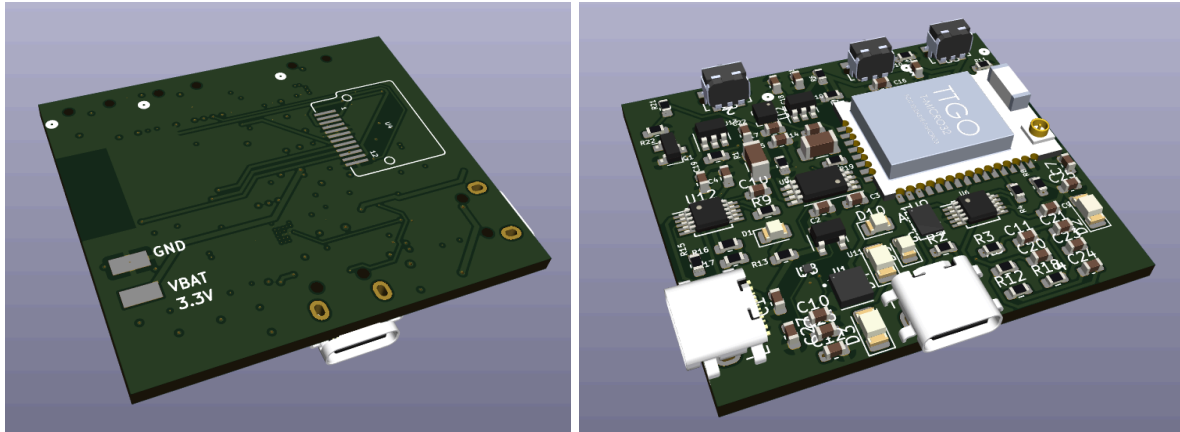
Top view of the PCB, containing screen display interface and battery interface (left), and bottom view of the PCB, containing biosensors, processors, buttons, power management devices, and USB-C inserts (right).
